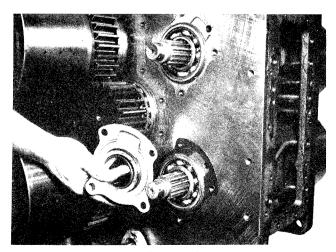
Remove input shaft bearing cap bolts and bearing cap.
